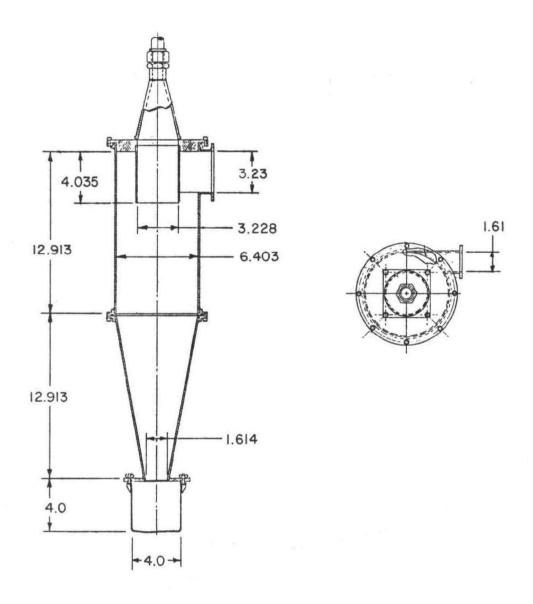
Engineering dimensions (inches) for Cyclone SRI-2.
